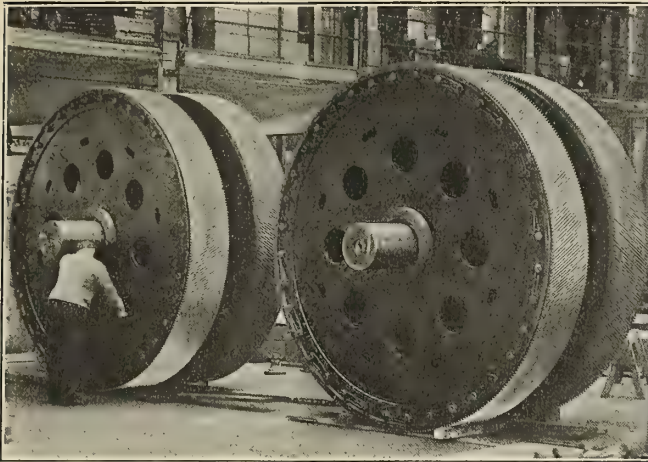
Gear Wheels for 35,000 Horsepower Reduction Gears. Diameter of Gears, 120 Inches; Diameter of Pinions, 7 Inches; Revolutions per Minute, 1,900 to 110
